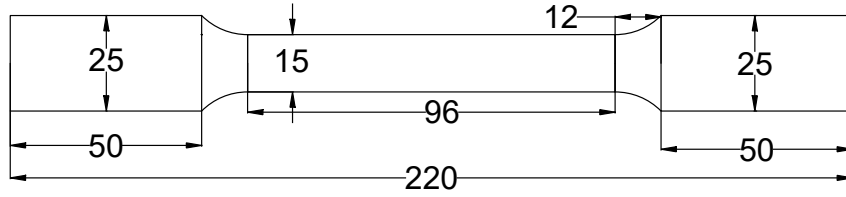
Dogbone specimen design for 4.76 mm thick Aluminium Al6061. All dimensions are in millimetres (mm).
